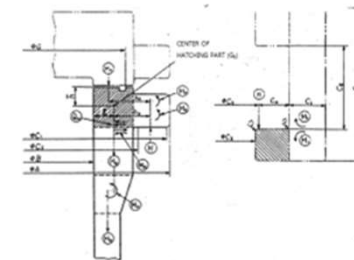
LOAD CONDITION OF INTEGRAL CLAMP TYPE
